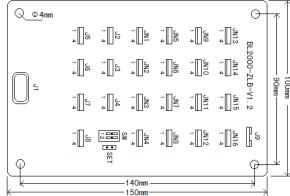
CALL TOP BOARD BL2000-ZLB-V1.2 SHAPE & DIMENSION
